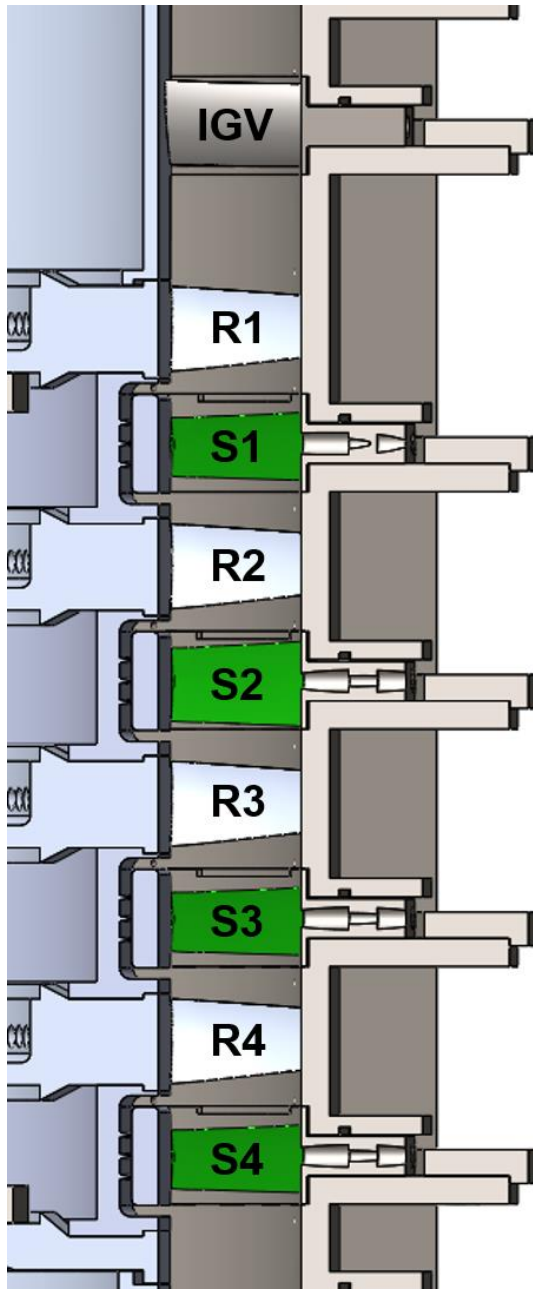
Cross-Sectional View of Compressor Stages and Casings
